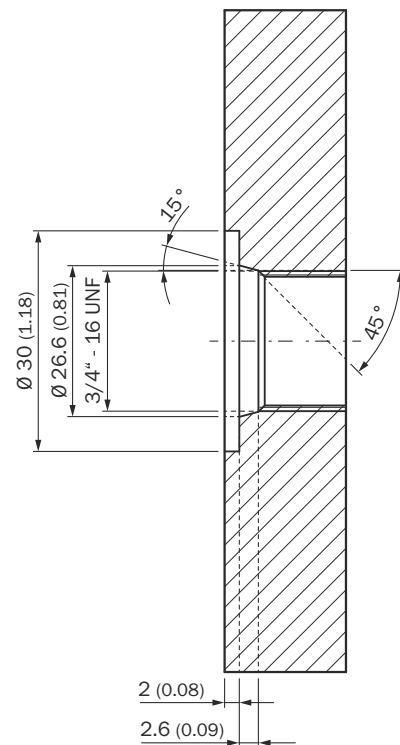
Threaded bore 3/4" - 16 UNF according to SAE J475, 16.36x2.21 O-ring
